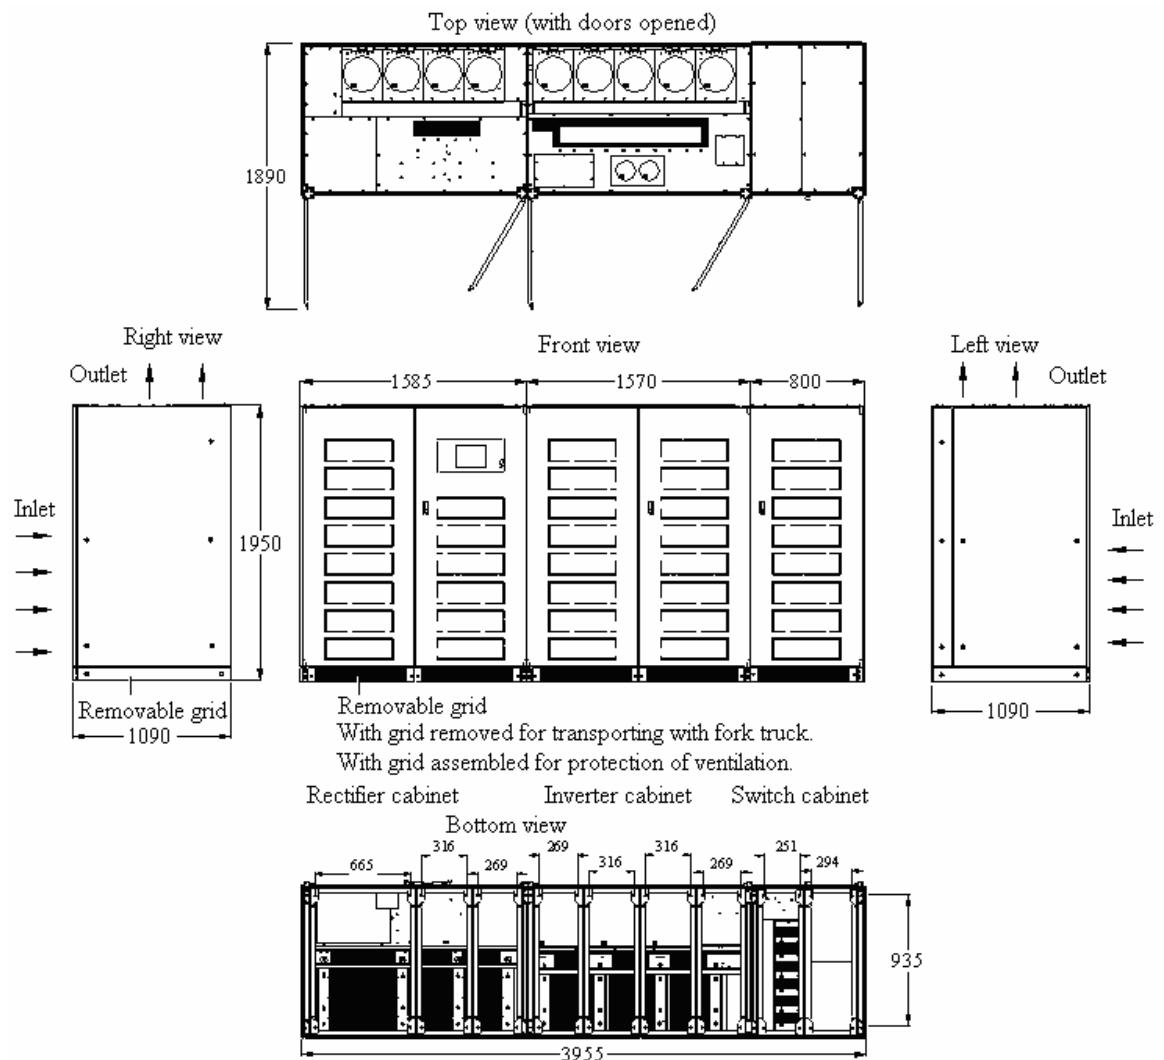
4 Top, front, side and bottom views of 800kVA UPS (unit in mm)
